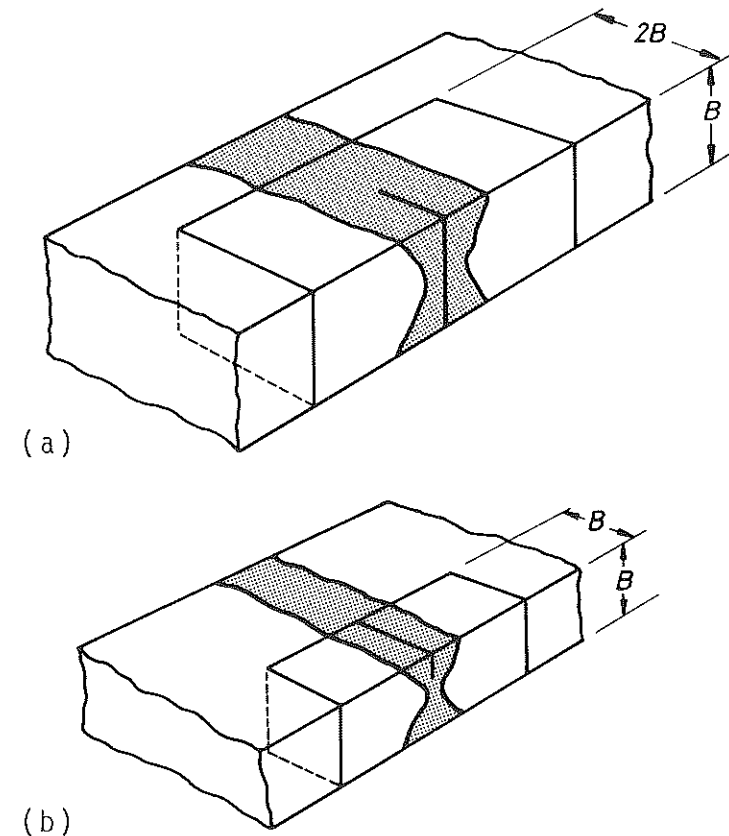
Typical examples of specimen extraction associated with standard specimen designs
